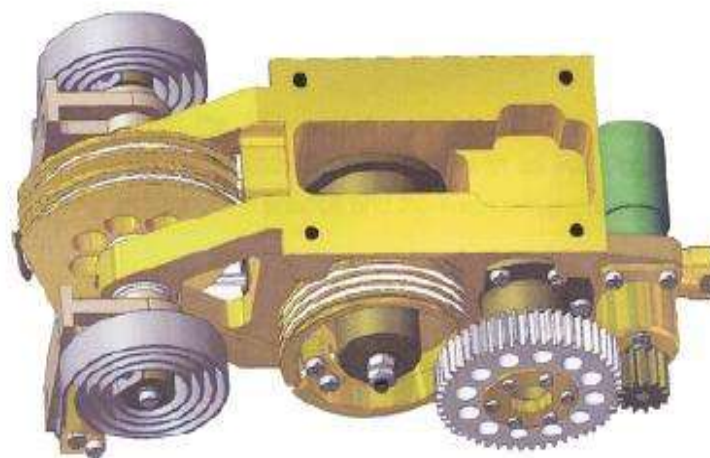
Solar Arrays Deployment Mechanism using Spiral Torsion Spring [31].
